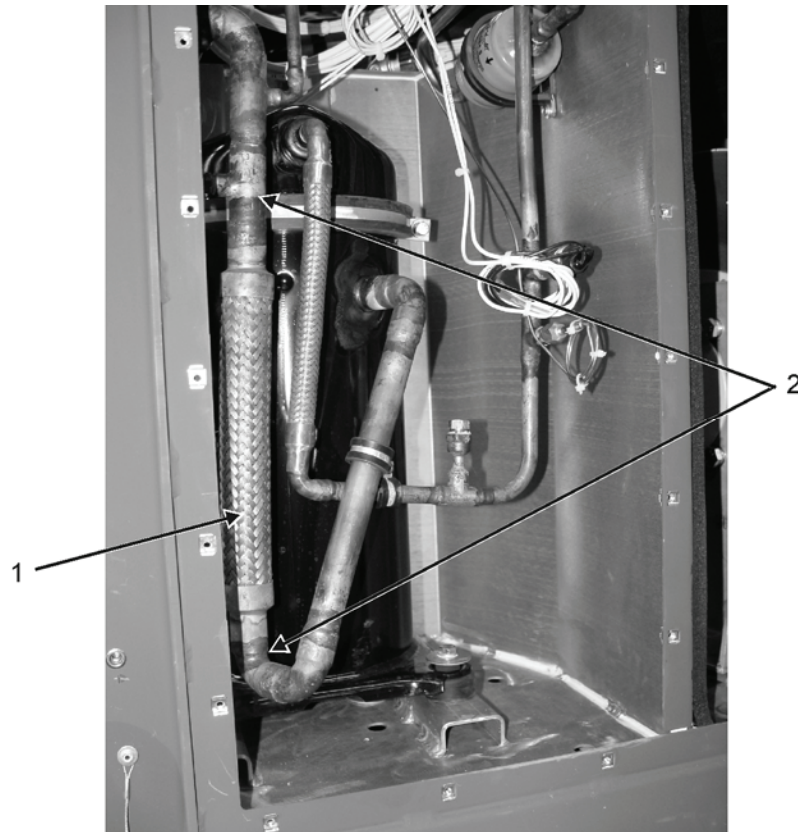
Metal Hose Assembly (Vibration Damper) (Suction) with Insulation Removed
